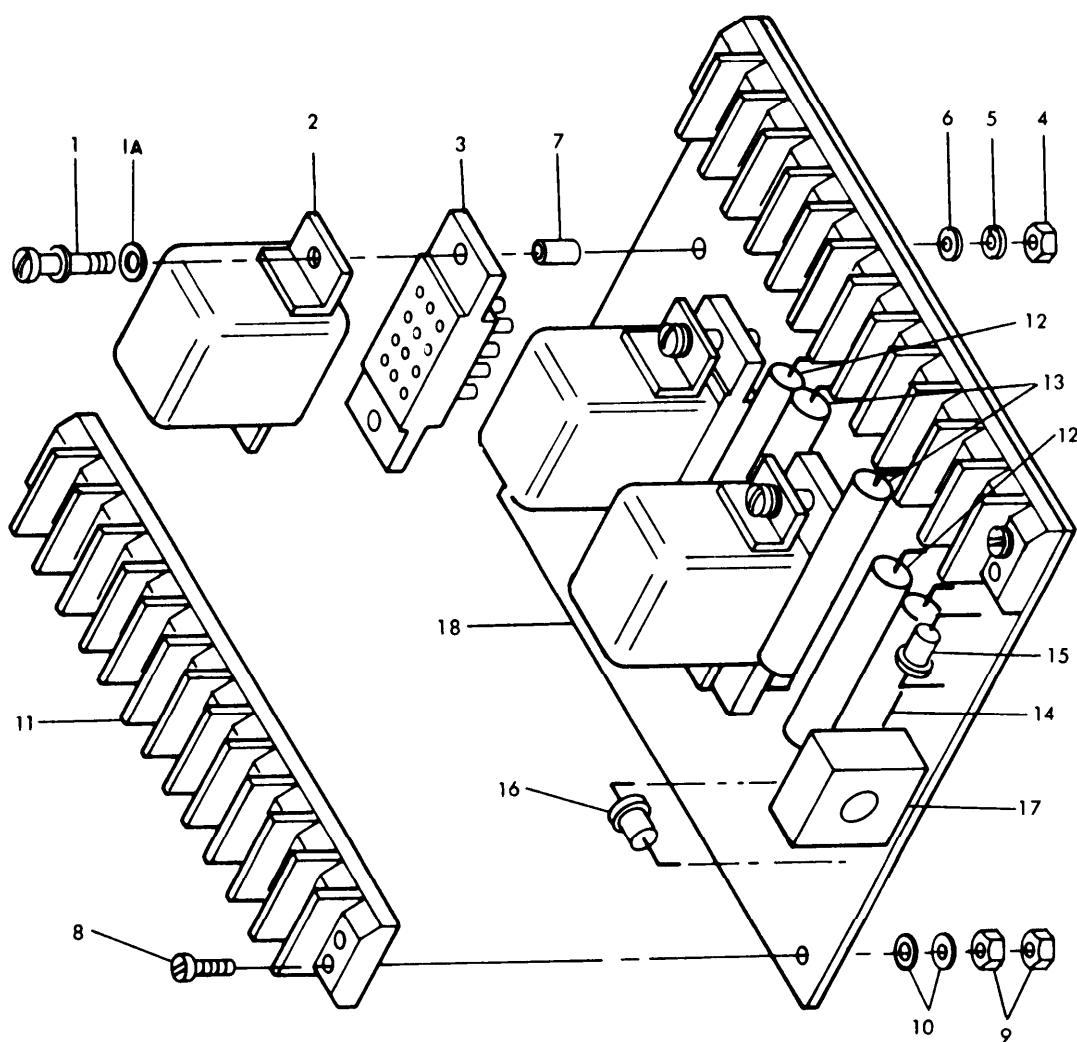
Special Relay Box Assembly (Sheet 2 of 2)
